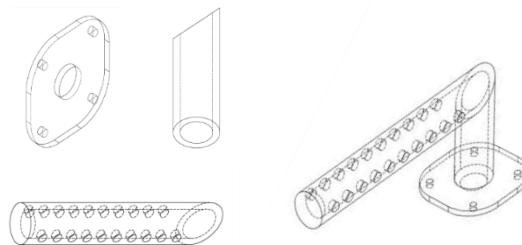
Left: preliminary drawing of the different handle parts. Right: preliminary drawing of handle subassembly (invisible lines are present in order to better perceive that the handle was hollow).
